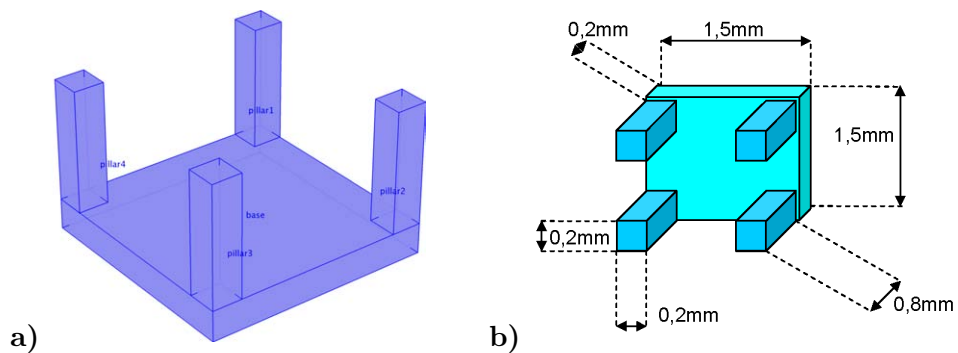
Pyrex support *inverted table* shape a) lateral view, b) dimensions.
